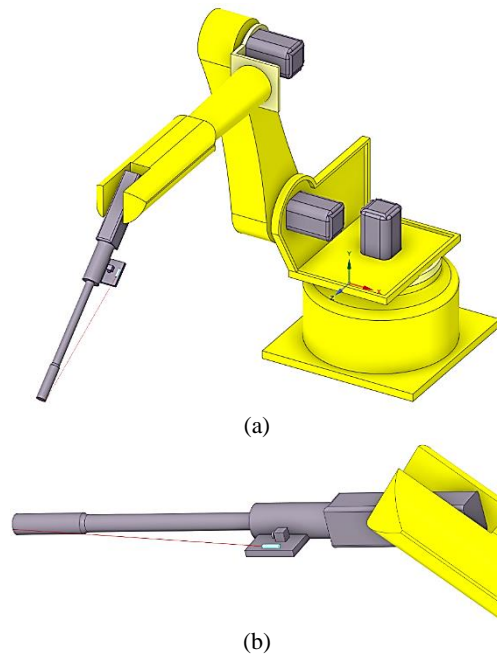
Mobile Camera Approach; (a) 3D schematic of a welding robot. (b) Welding robot viewed from the side.
